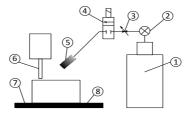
Schematic setup for cryogenic machining, 1-Liquid nitrogen Dewar, 2-pressure gauge, 3- gate valve, 4- solenoid on/off valve, 5- specially designed nozzle, 6- cutting tool, 7- workpiece, 8- machine table
